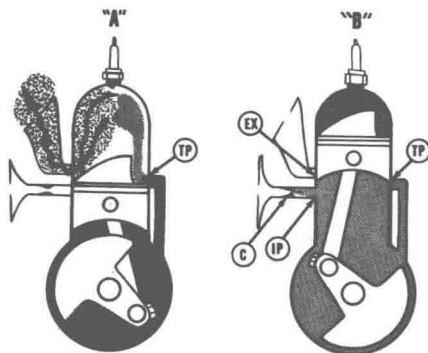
Schematic diagram of two-stroke cycle engine operating on Otto Cycle. Engine differs from that shown in Fig. 1-1 in that piston is utilized as a sliding valve to open and close intake (carburetor to crankcase) port (IP) instead of using reed valve (R—Fig. 1-1).
